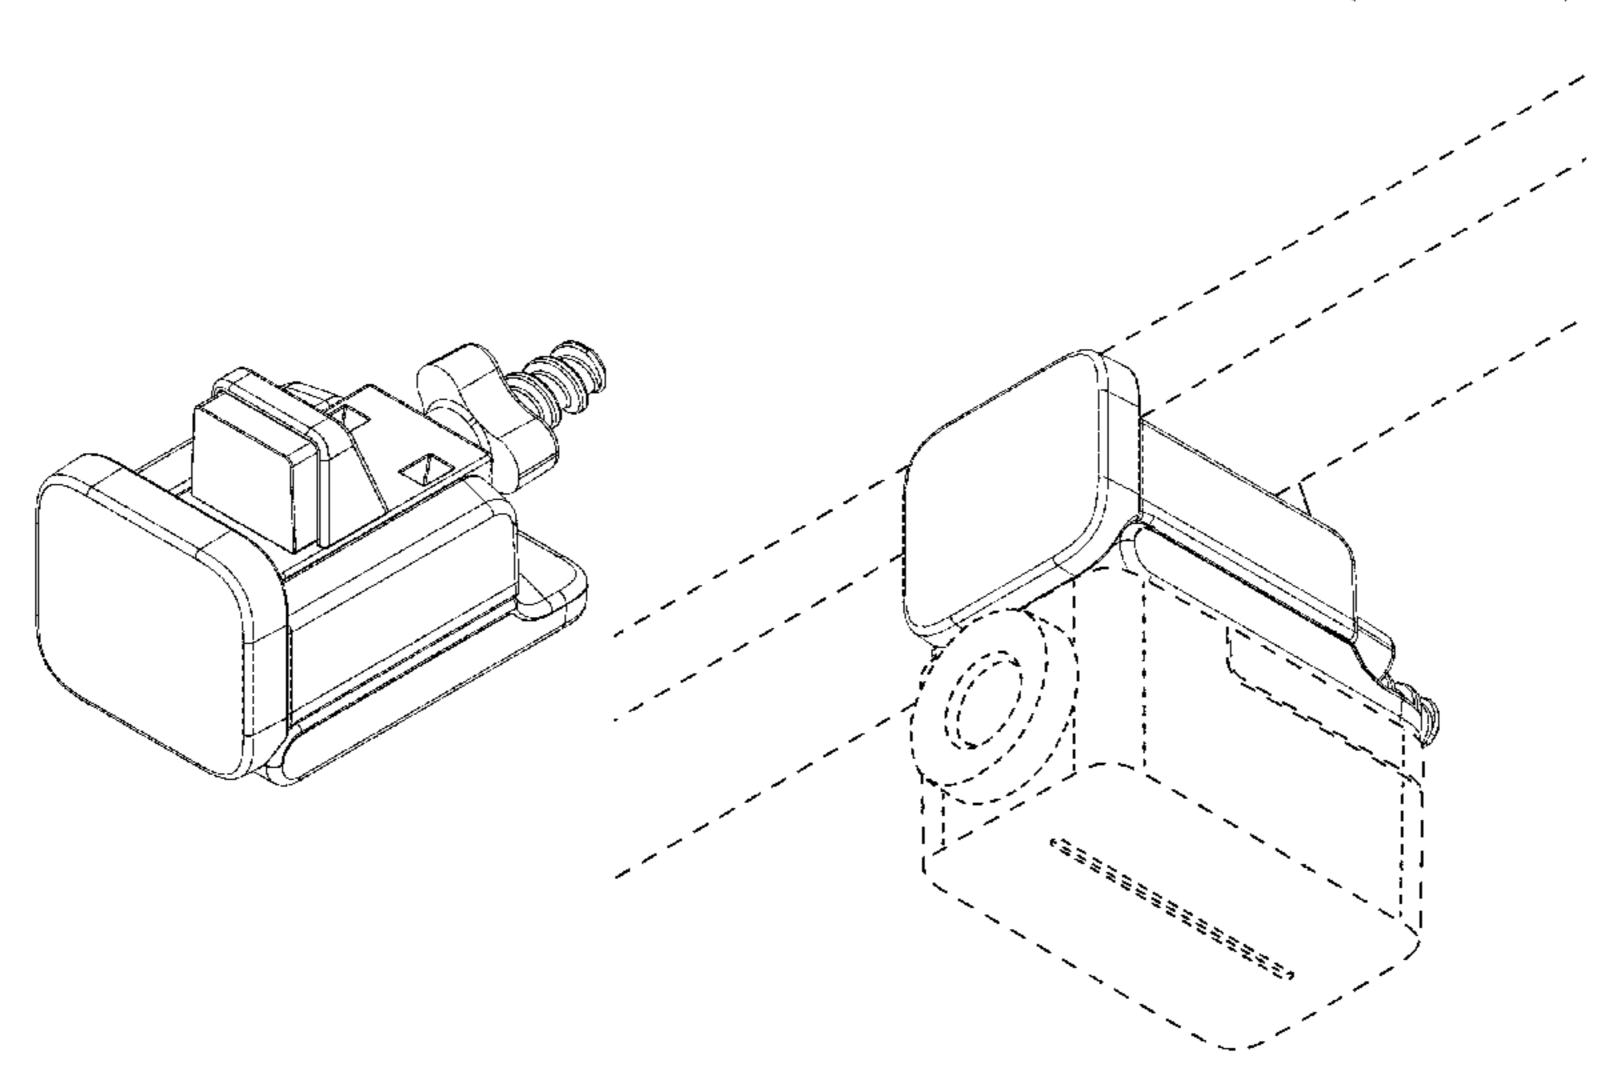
is a back, bottom, and side perspective view thereof in an un-folded configuration, showing a partially closed aperture on the partially unfolded mount stand portion of the camera mount assembly;
